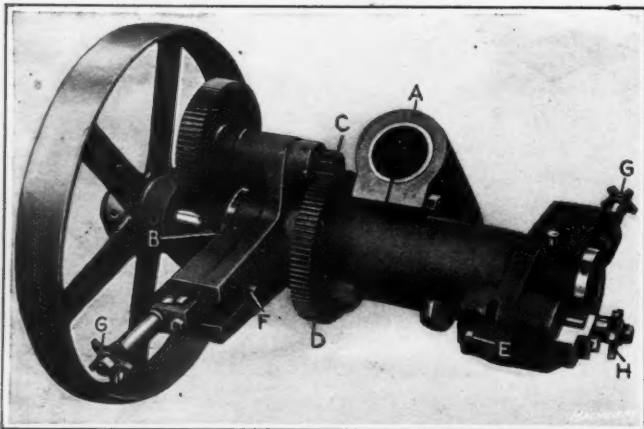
Close View of Boring and Facing Equipment removed from Lathe Head to show Features of Design
